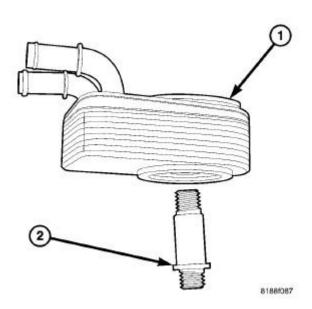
Oil Cooler & Oil Cooler Connector Bolt Courtesy of CHRYSLER GROUP, LLC
